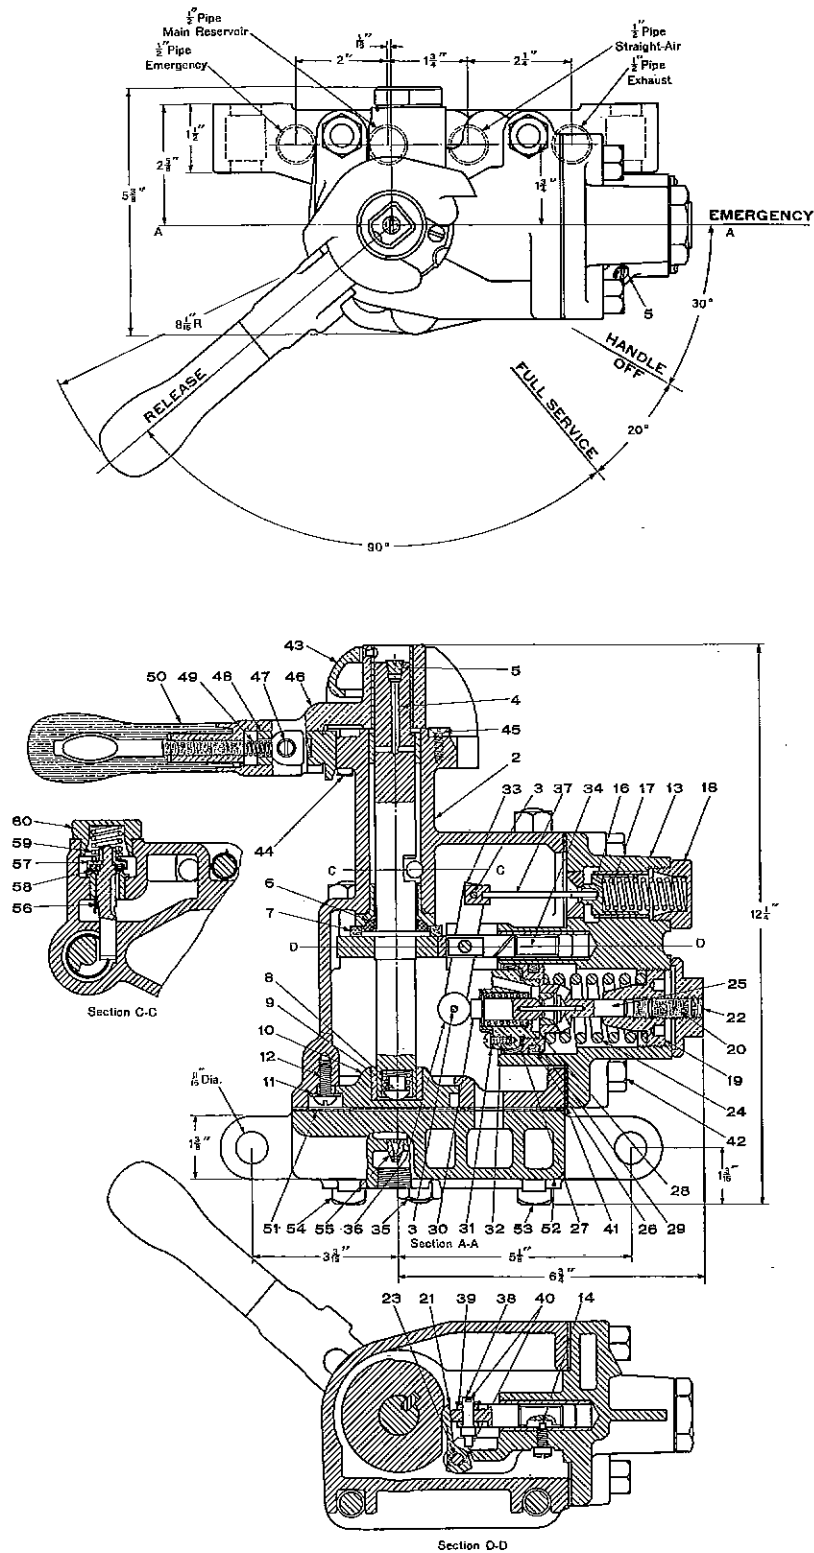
M-36 Self-Lapping Brake Valve, Assembly
